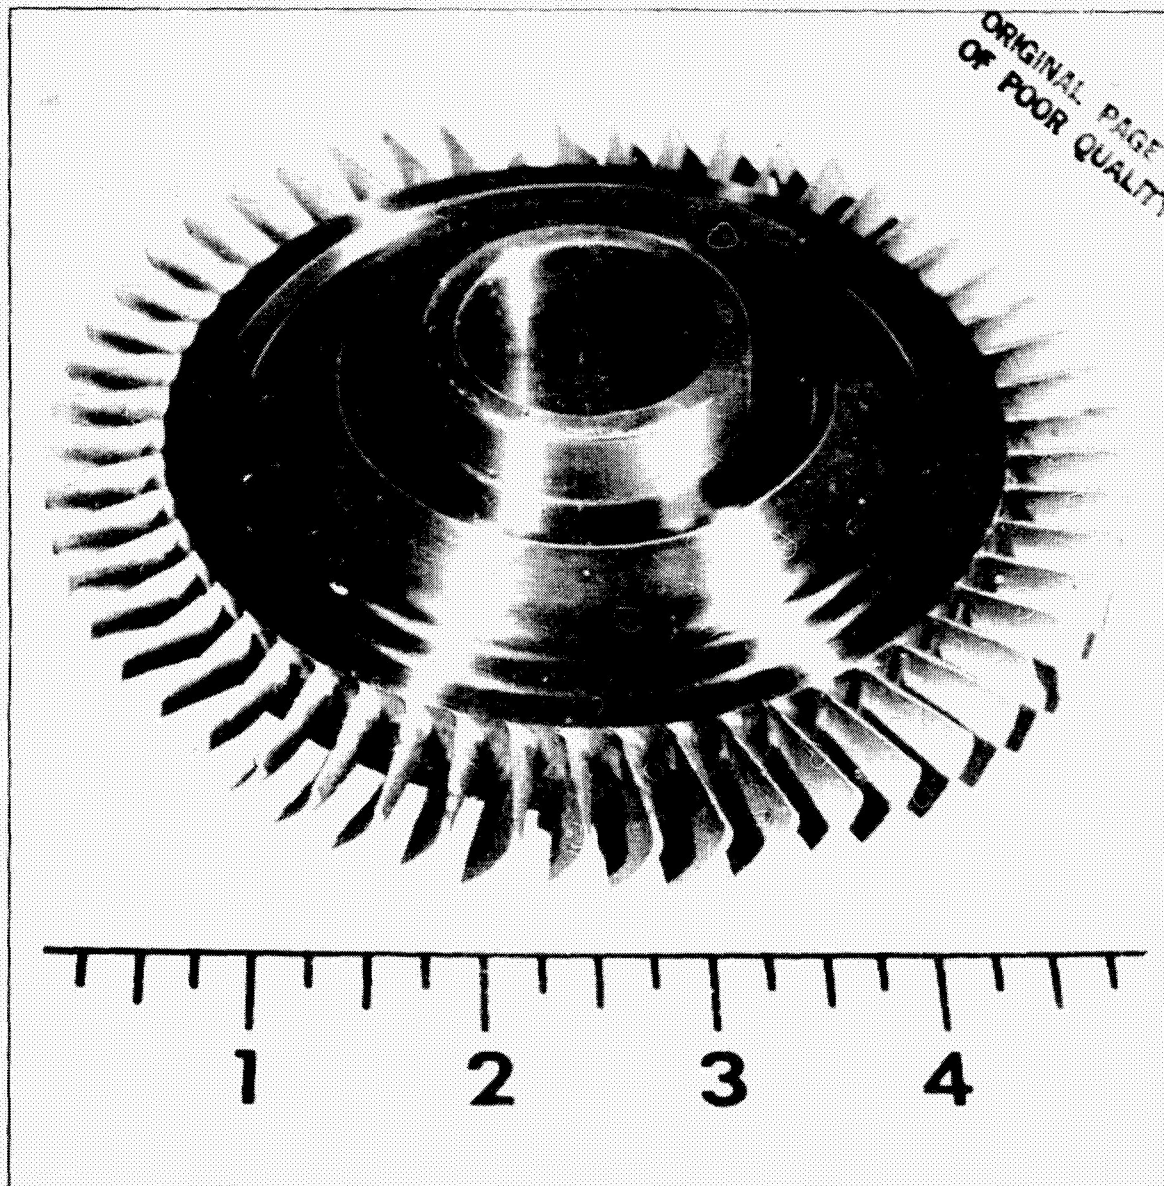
Turbine wheel fabricated from cast TZM blade ring and forged TZM disk by electron beam welding
